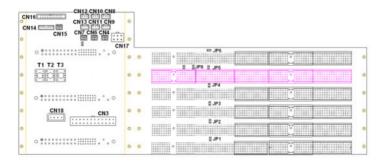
The connector and jumper locations on the rear side. (MIC-3812)
